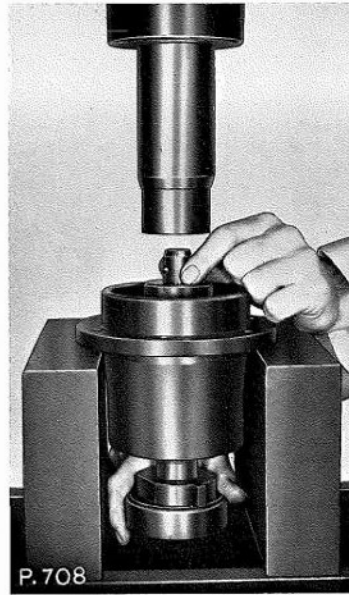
Pressing out the bevel pinion outer bearing cup from the bearing sleeve, using the Churchill Tool R.G.323, in conjunction with the universal handle 550, applied in the reversed position
